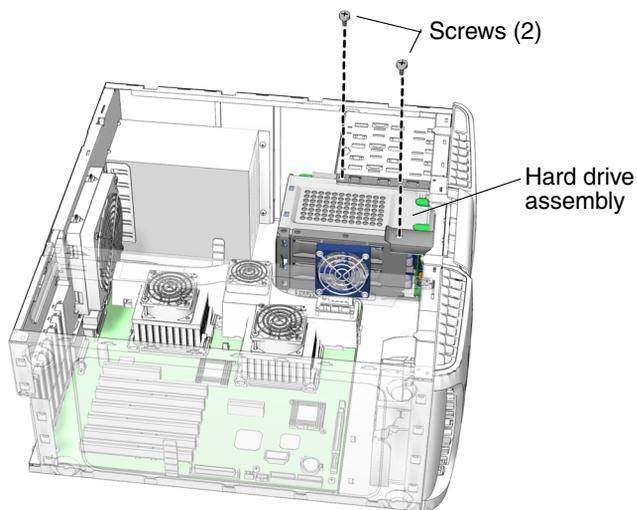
Removing the Hard Drive Assembly Screws
